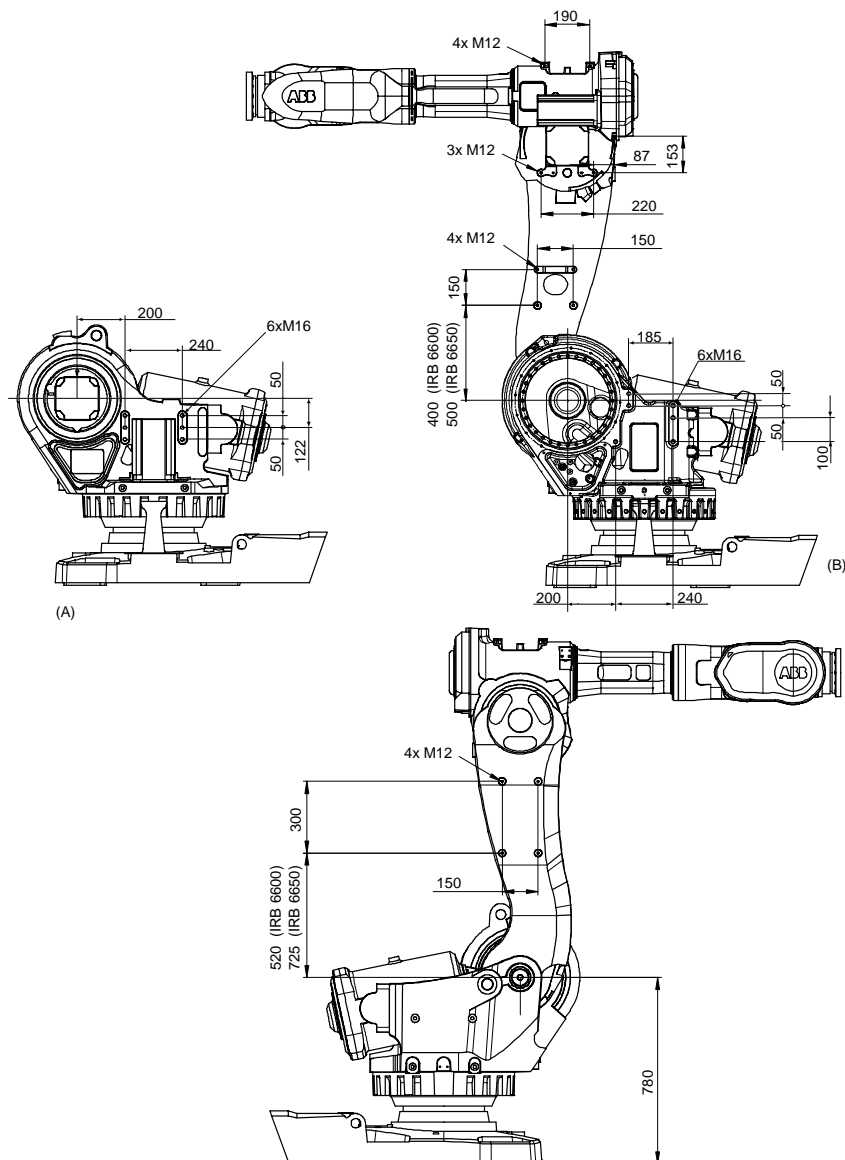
Holes for mounting extra equipment on the upper and the lower arm, and the frame on IRB 6600/ 6650 (dimensions in mm).
